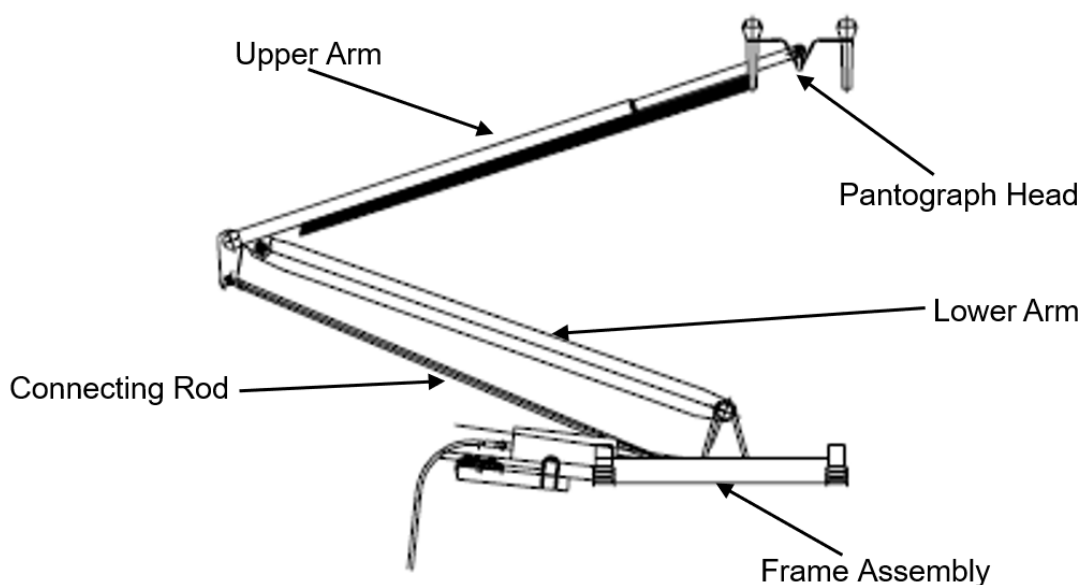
Illustration of the pantograph assembly fitted to 401 trams
